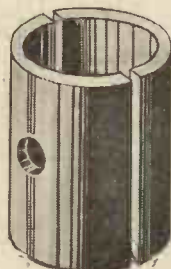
(Above) the shoes and core assembled, and (right) a piece of tube cut down the centre and drilled.
